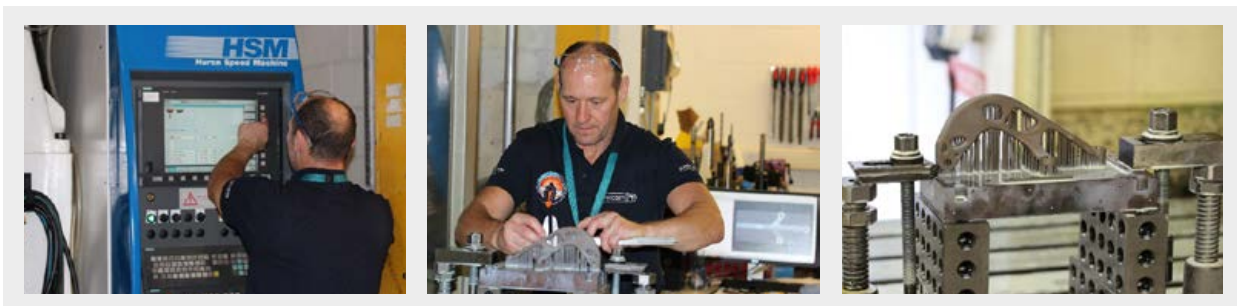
Machine setup and fixturing: setting up the milling machine by defining part position and alignment, clamping and programs before cutting
